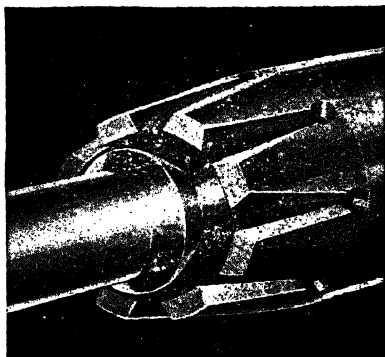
Method of attaching end trunnions to cylindrical body of hollow roller.
